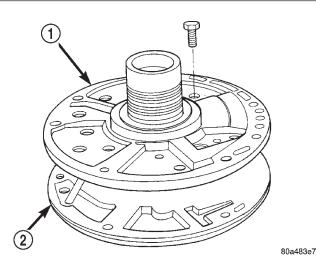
Pump Support Bolts 1 – REACTION SHAFT SUPPORT
